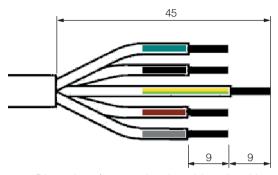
Dimensions for removing the rubber sheathing and insulation
